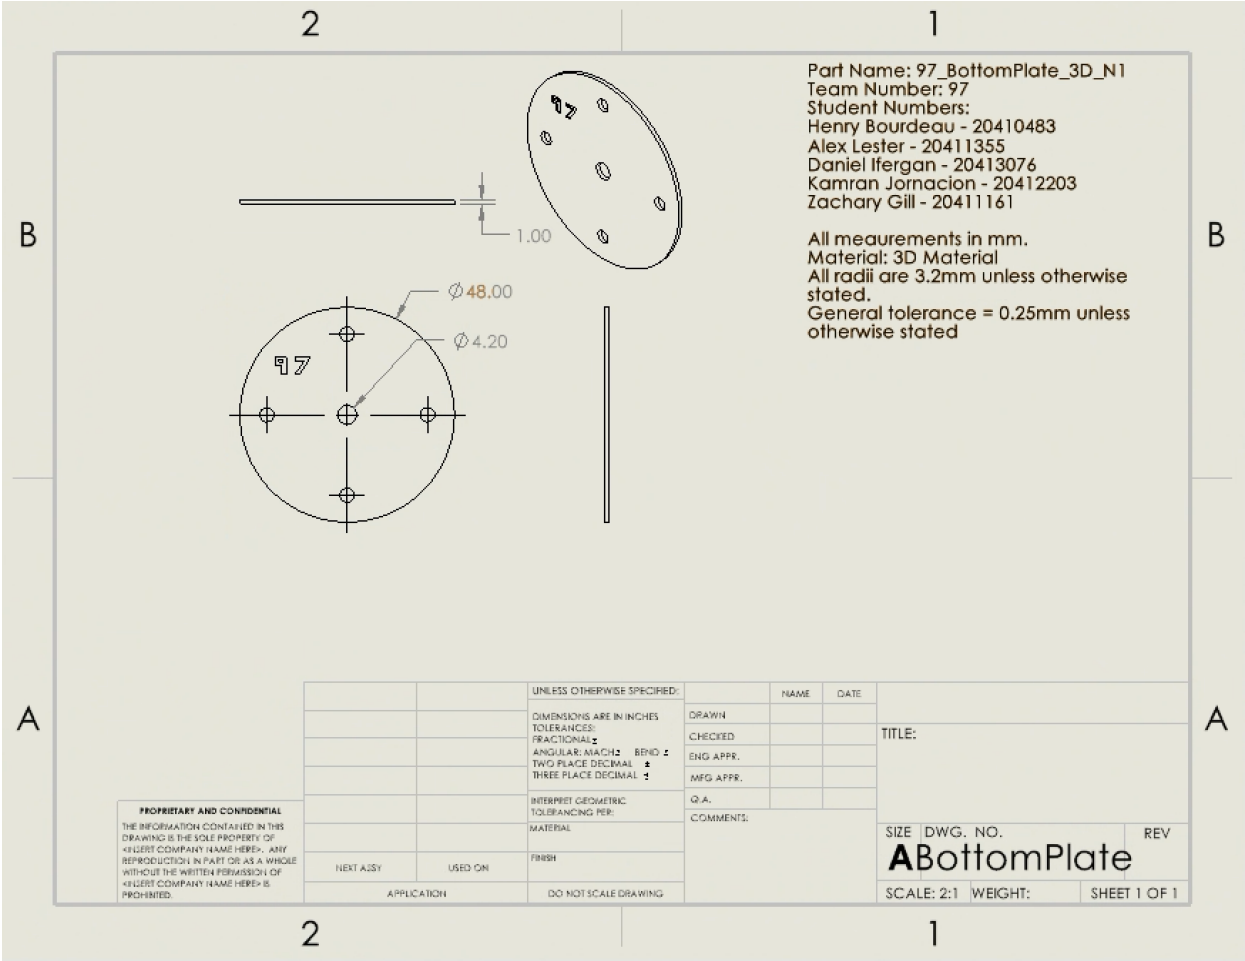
Working drawing for 97\_BottomPlate\_3D\_N1
